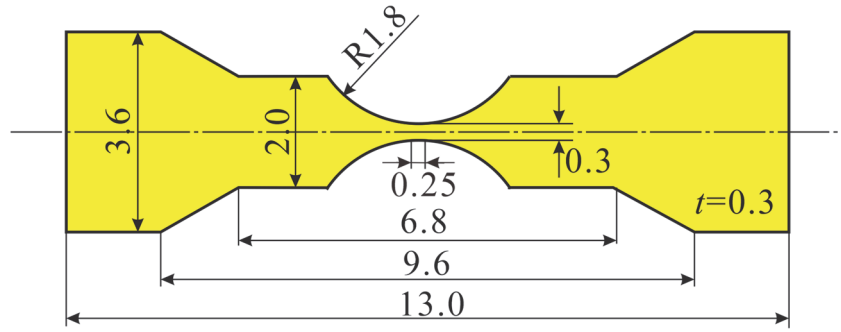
Shapes and dimensions of the tensile test specimens (Dimensions in mm).
